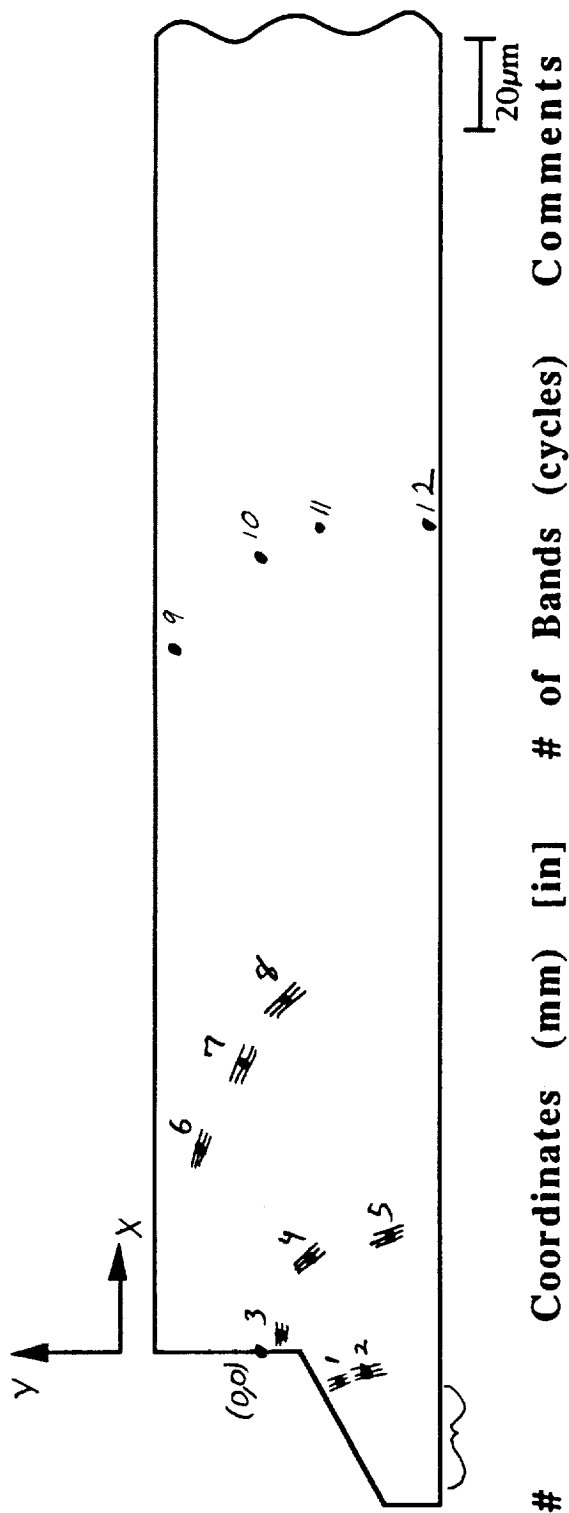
Rivet hole schematic: Upper rivet row, hole number 4J5, fatigue crack growth is in the forward direction.
